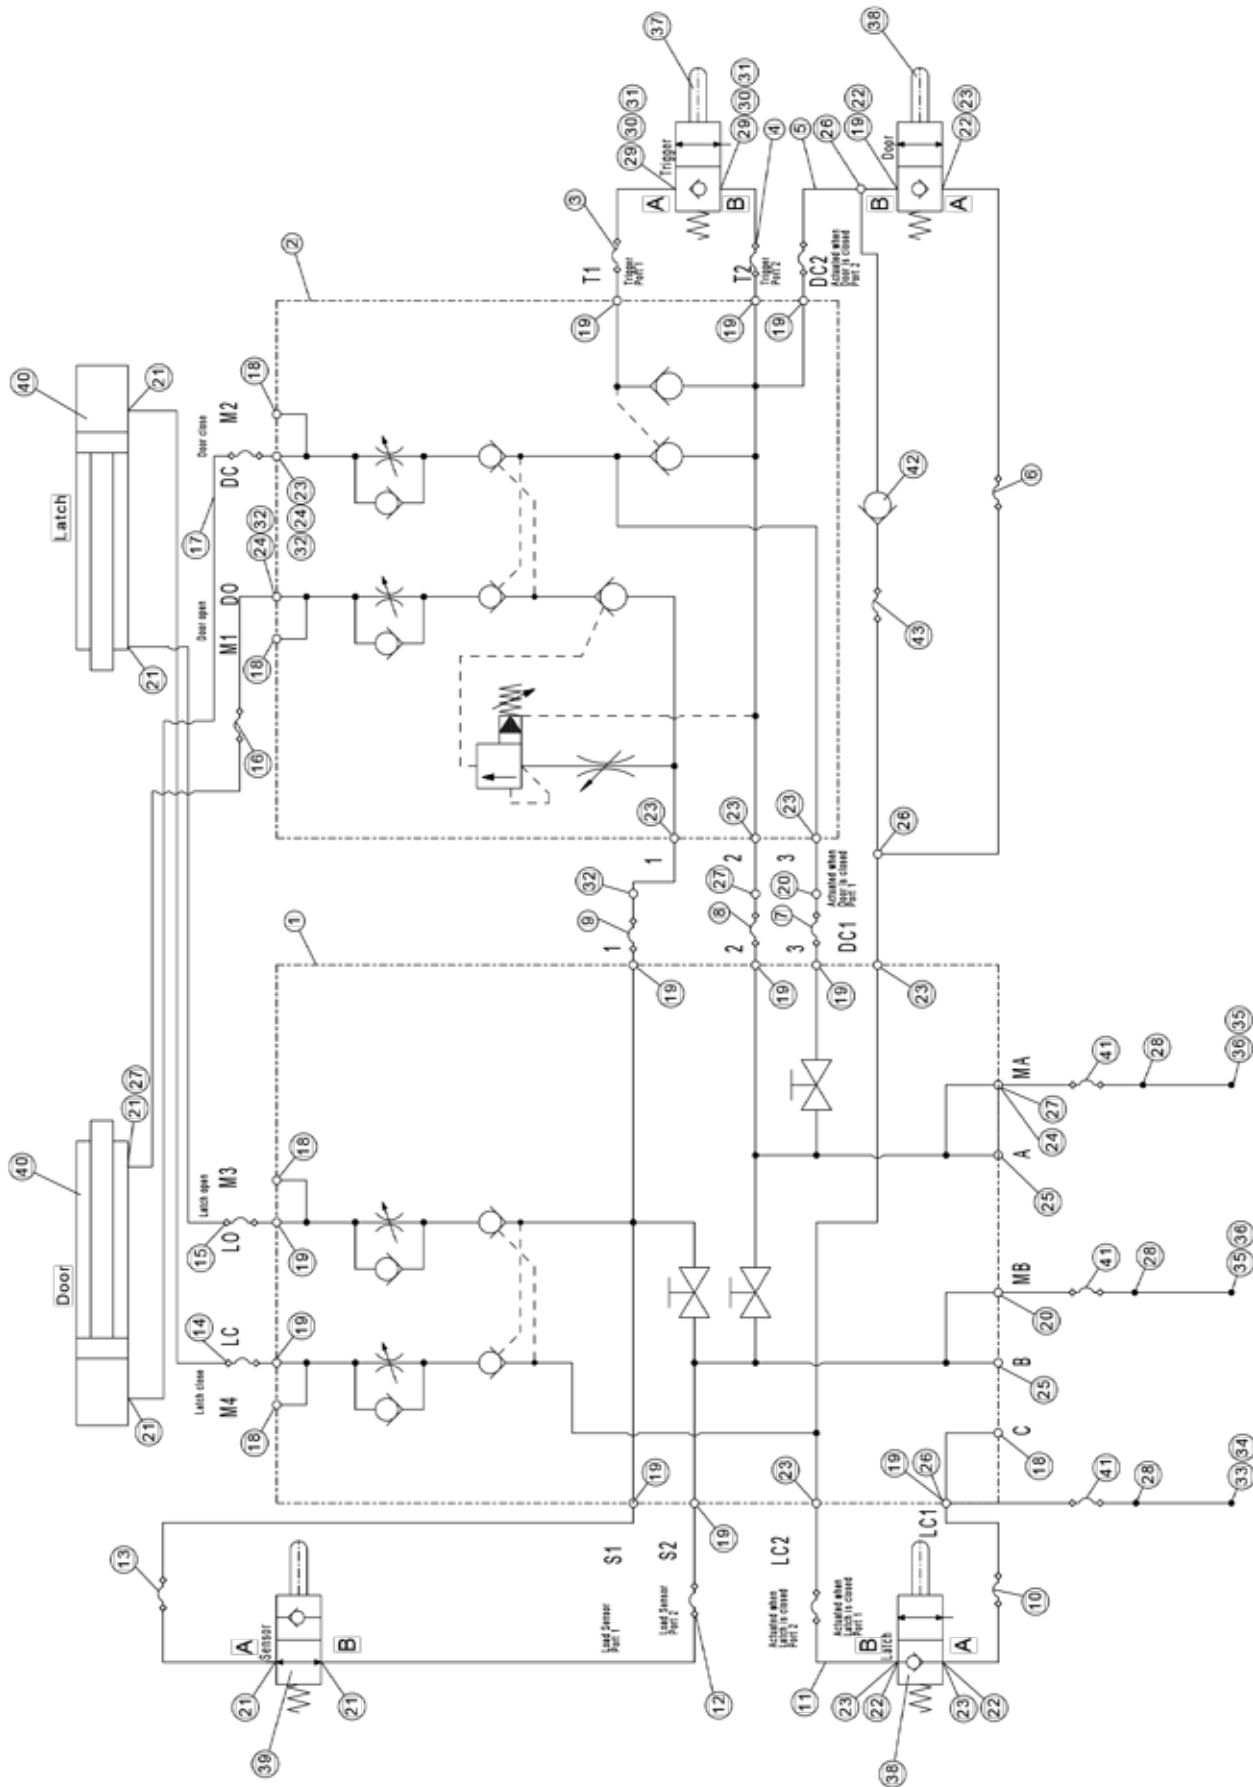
645003-6 Hydraulic Assembly Elevator
